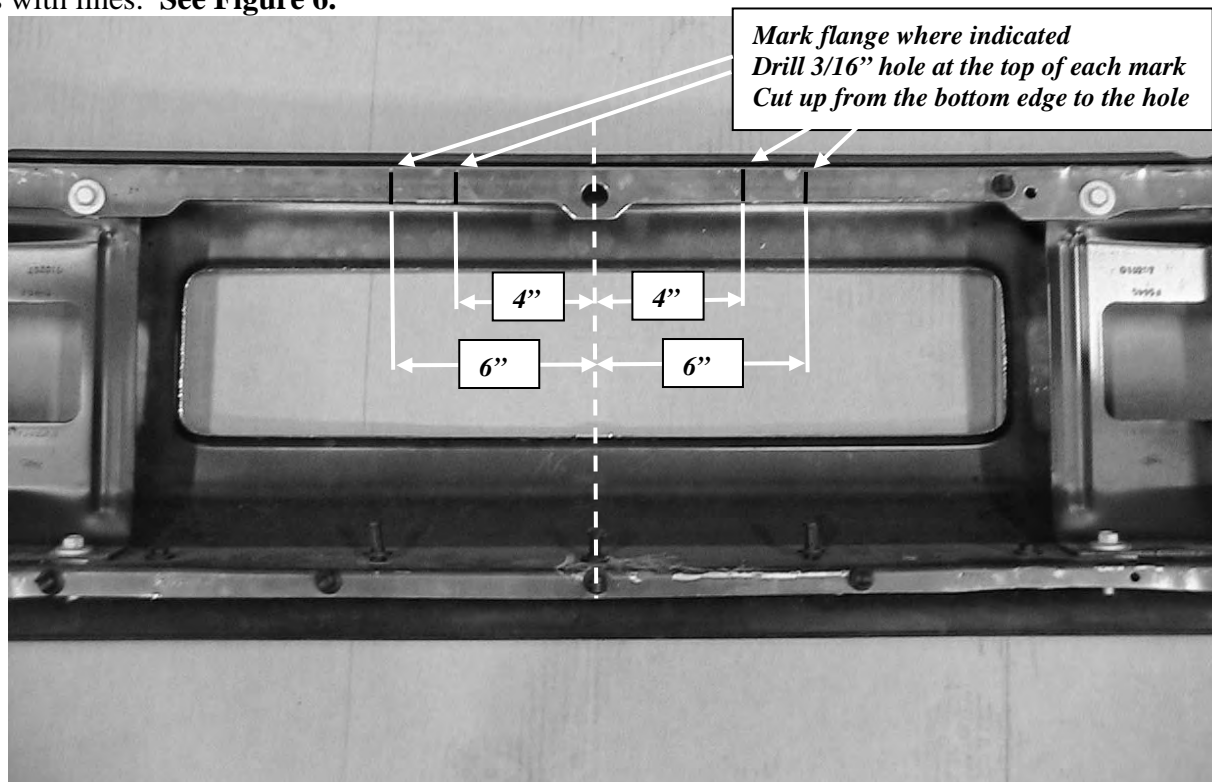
Bumper Flange drilling/cutting locations. Left and right side should be marked the same.
